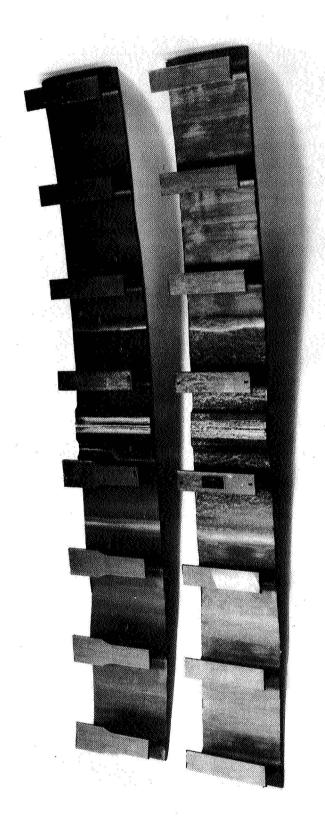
Welded Configuration Section 0.5 Inch Thick Weld, With and Without Touch-up Treatment - 24 Hours Salt Spray
